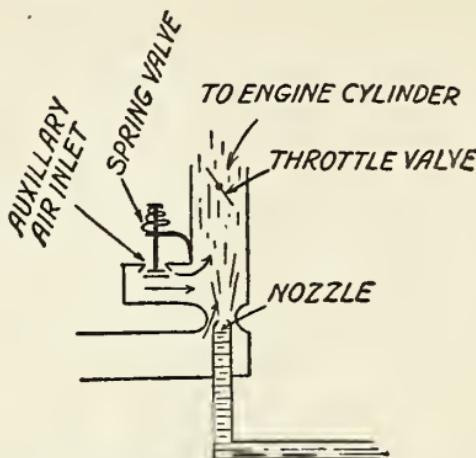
A. The auxiliary air inlet of a carburetor.
